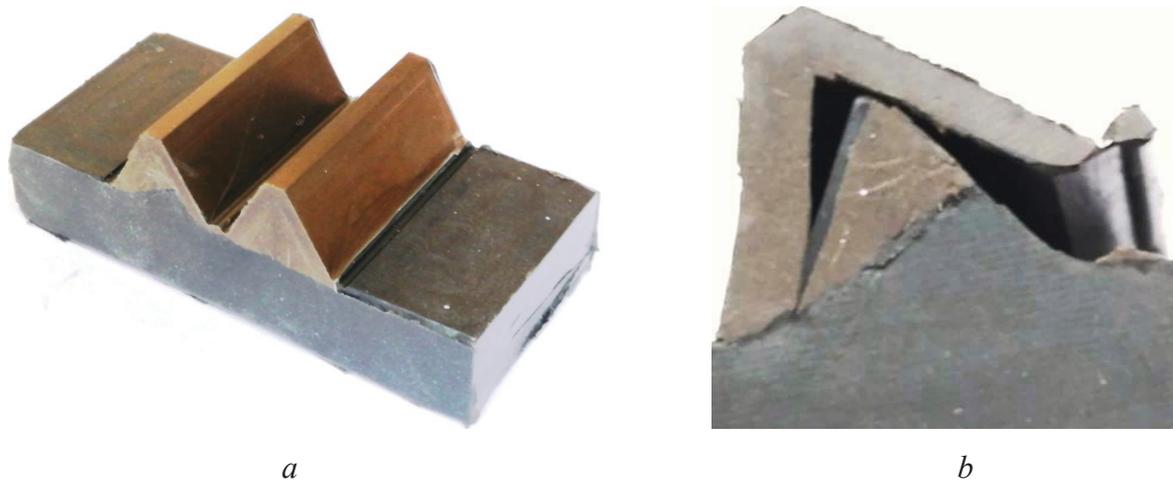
Two-tooth fragment of a hone after vulcanization (*a*) and a view of the end part of a hone tooth with prevulcanized abrasive layer (*b*)
